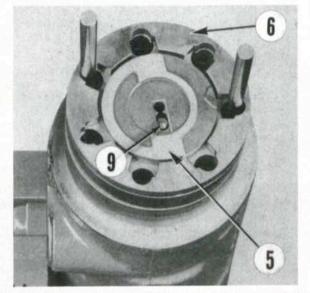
Be sure that nose of drive link (9) engages slotted hole in commutator (5).
